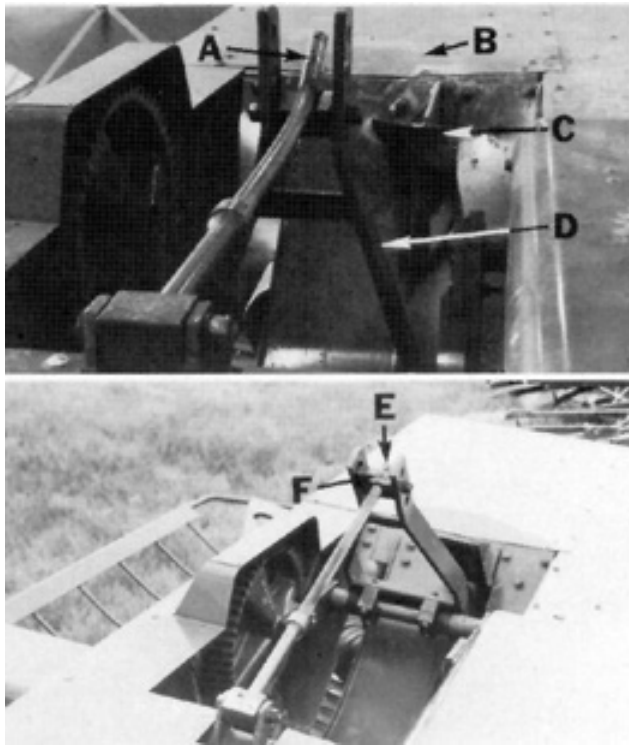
Bent Components due to Packer Finger Guide Rod Retaining Cotter Pin Failure: (A) Packer Finger Guide Rod, (B) Sheet Metal Shielding, (C) Deflector Plate, (D) Packer Fingers, (E) Retaining Cotter Pin, (F) Packer Finger Shear Pin.
